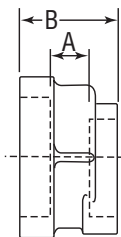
Eccentric Reducer	Size				A		B*		Unit Weight
